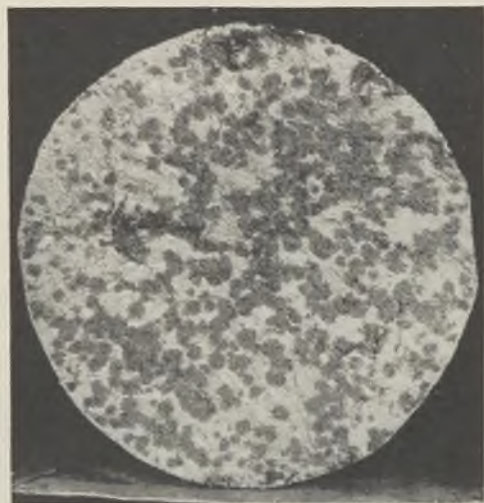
FRACTURE OF 3-IN. SECTION OF "WHITE" CAST IRON SHOWING MOTTLE.
